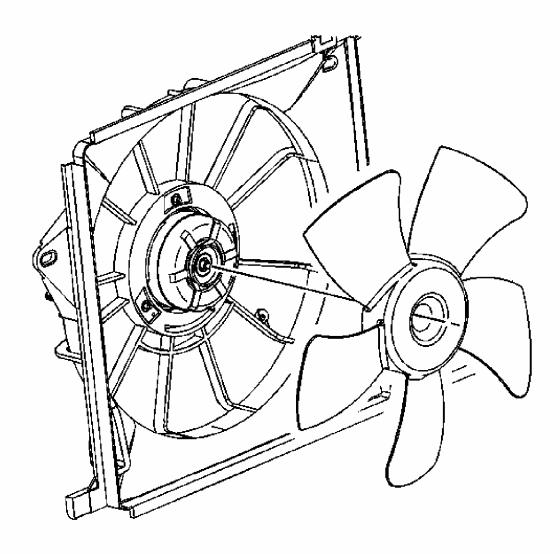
Removing/Installing Engine Cooling Fan Courtesy of GENERAL MOTORS CORP.
